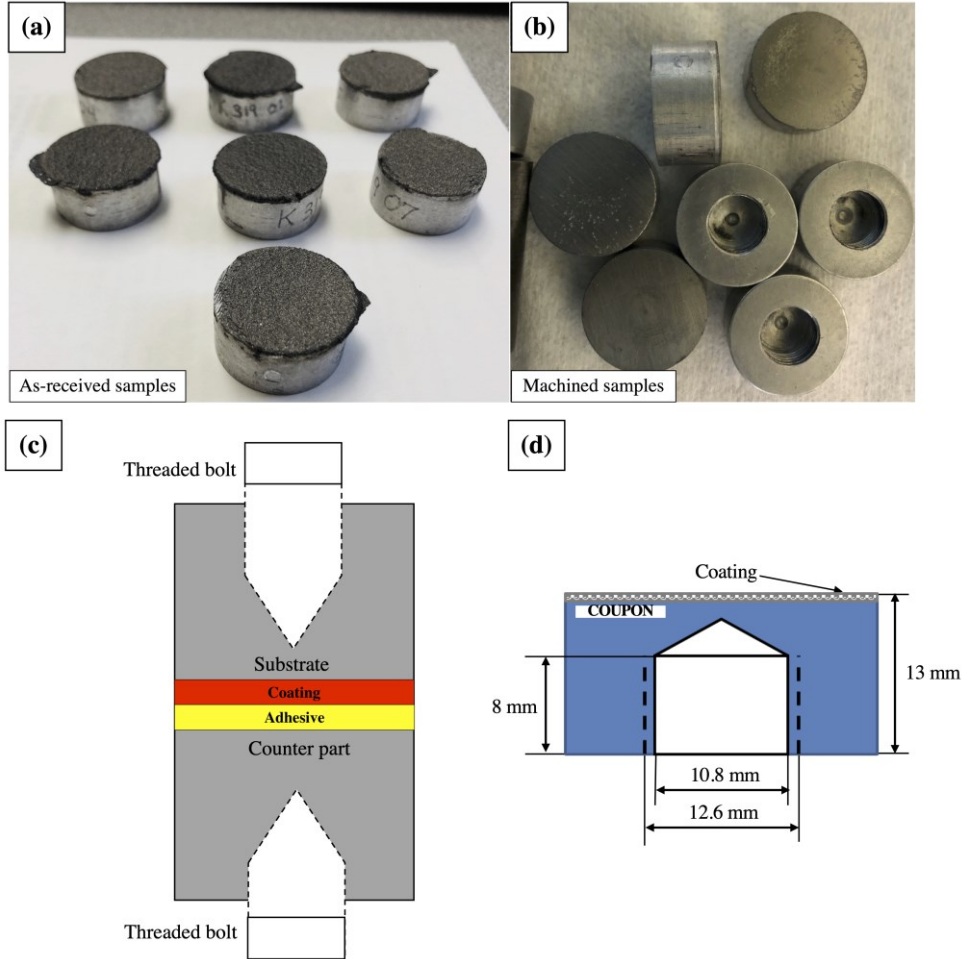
Coupon samples (a) as-received and before machining, and (b) post-machining to smooth the coating surface, and adhesion testing (c) setup, and (d) coupon geometry with threaded hole.
